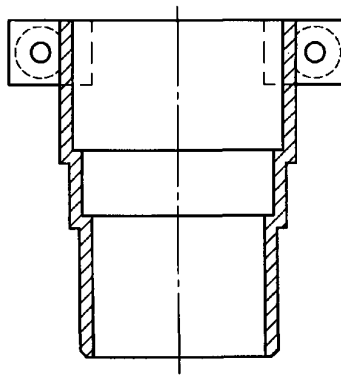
Typical pipe coupler with fixing lugs and outlet spigot sleeve
